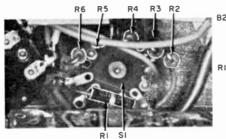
Preassemble the resistors and the switch in "turret" fashion before mounting.
